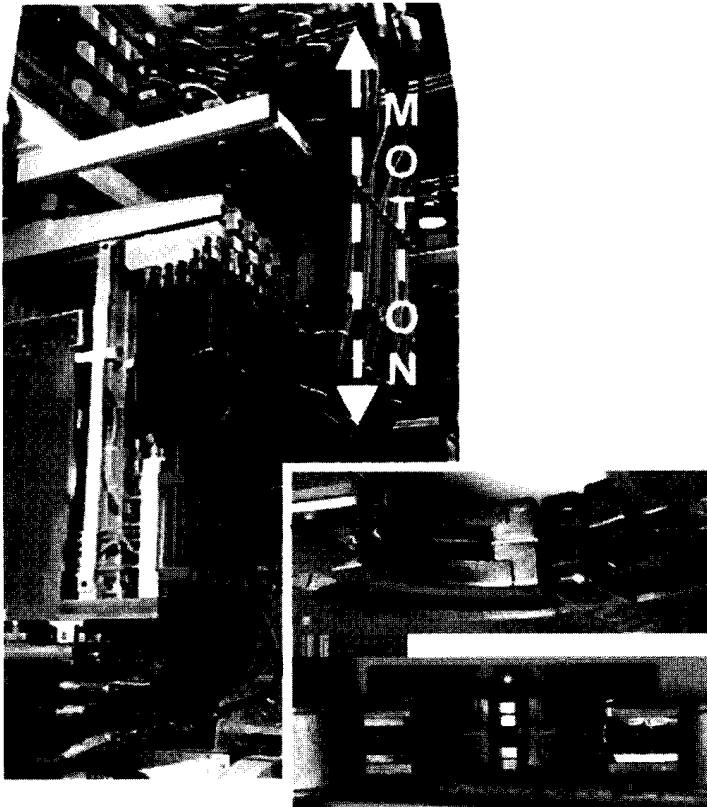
Conventional rotational-type crank shaft hardening machine with U-shaped coil.
